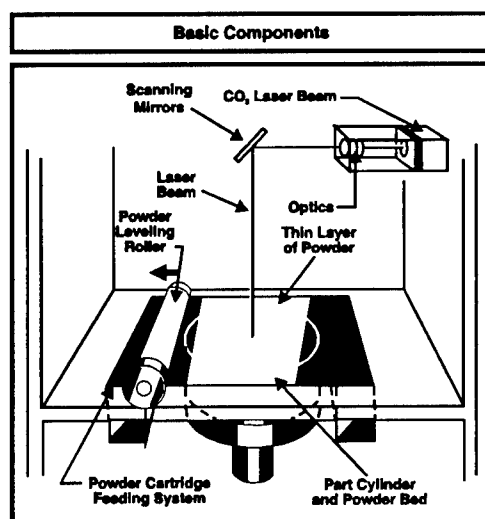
Selective Laser Sintering (SLS) Machine Diagram Showing Basic Components
